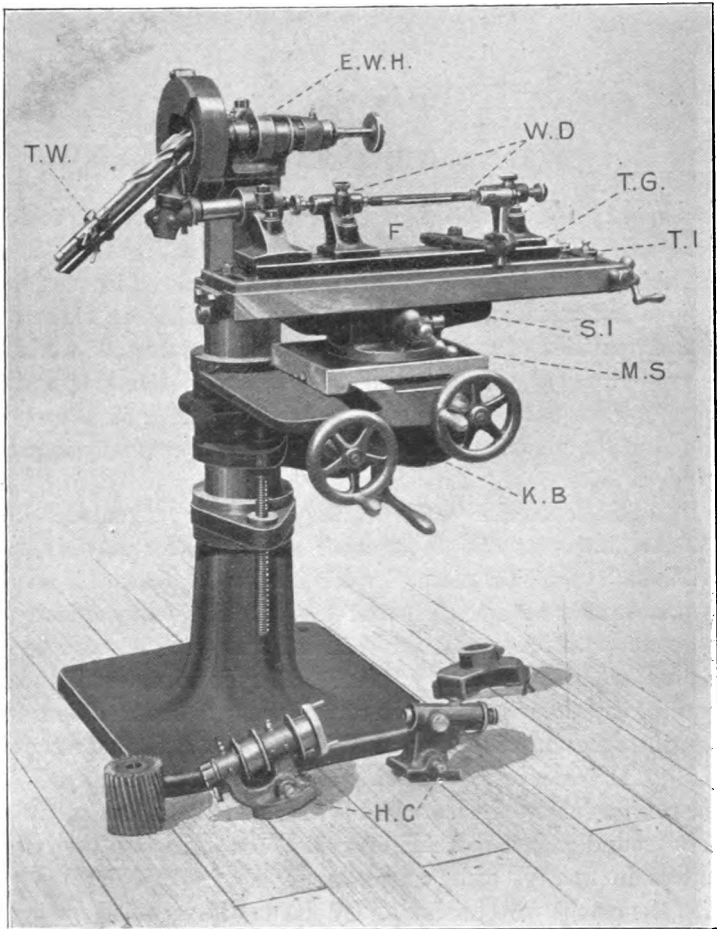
"Ward" Combined Cutter Grinder and Twist Drill Grinder.
